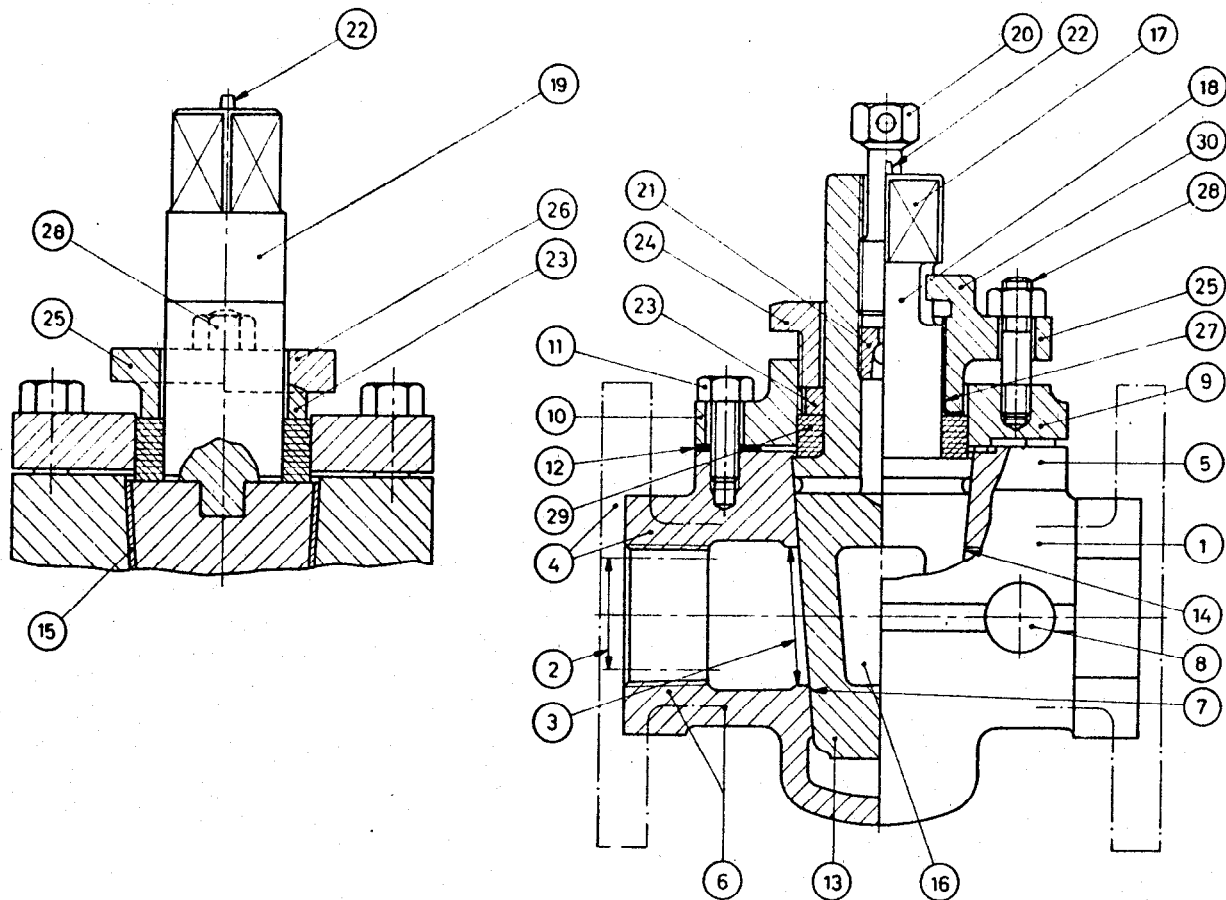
LUBRICATED PLUG VALVE, TAPER PLUG
